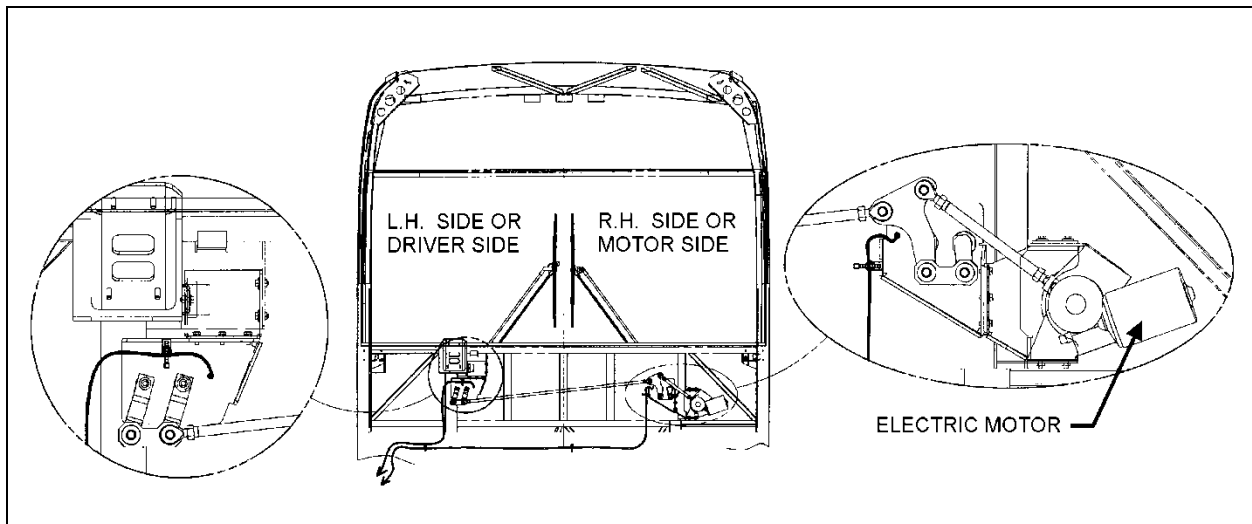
WINDSHIELD WIPER INSTALLATION
